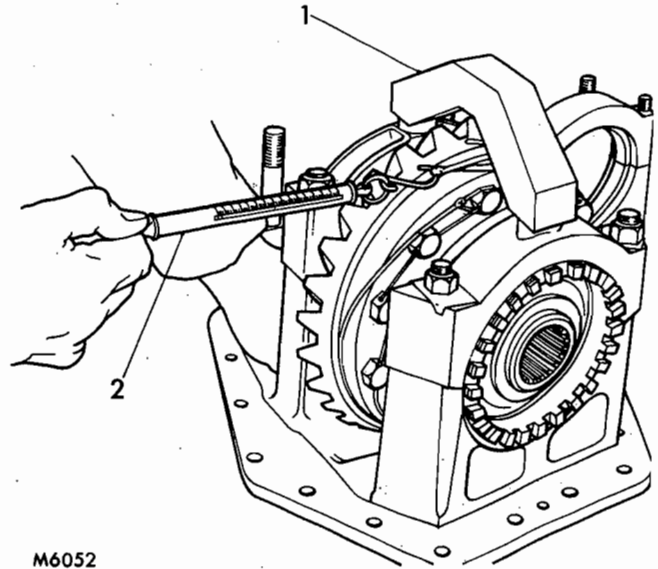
CHECKING DIFFERENTIAL BEARING PRELOAD
